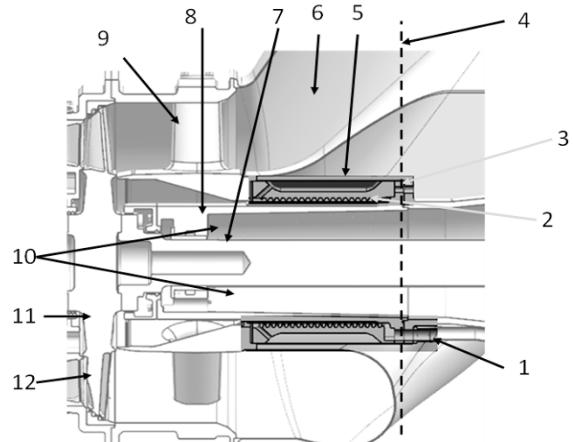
Schematics of the cooling part and its position. 1-Air inlet; 2-The helically coiled passage; 3- Contact surface between the cooling part and the shaft's casing (the "measure wall"); 4—"Measure wall's" position; 5- Position of the air outlet; 6- Exhaust system of the turboshaft; 7- The power turbine's shaft; 8- The shaft's casing; 9- Strut; 10- Region with oil, surrounding the shaft; 11- Power turbine's disk; 12- Power turbine's blade.
